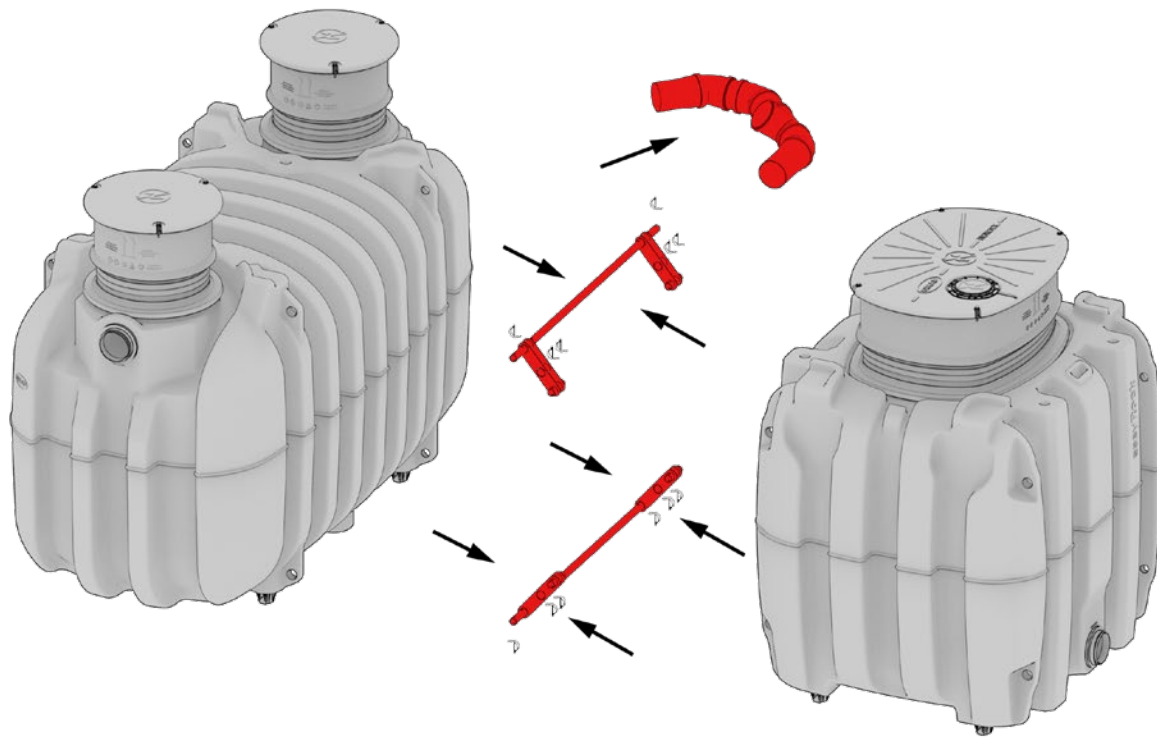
Pull all spring cotter pins out of the coupling tubes
